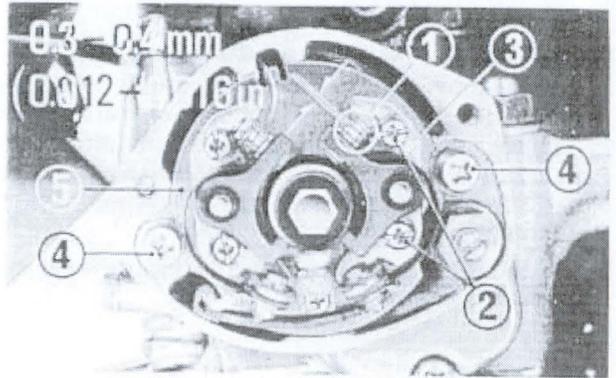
(1) Right hand points (4) Base plate locking screw
